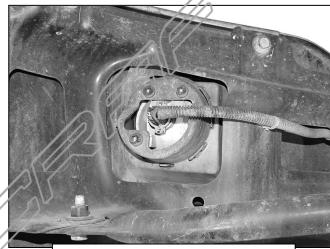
Driver/left side of Bumper attached to Winch Tray Bracket Assembly
